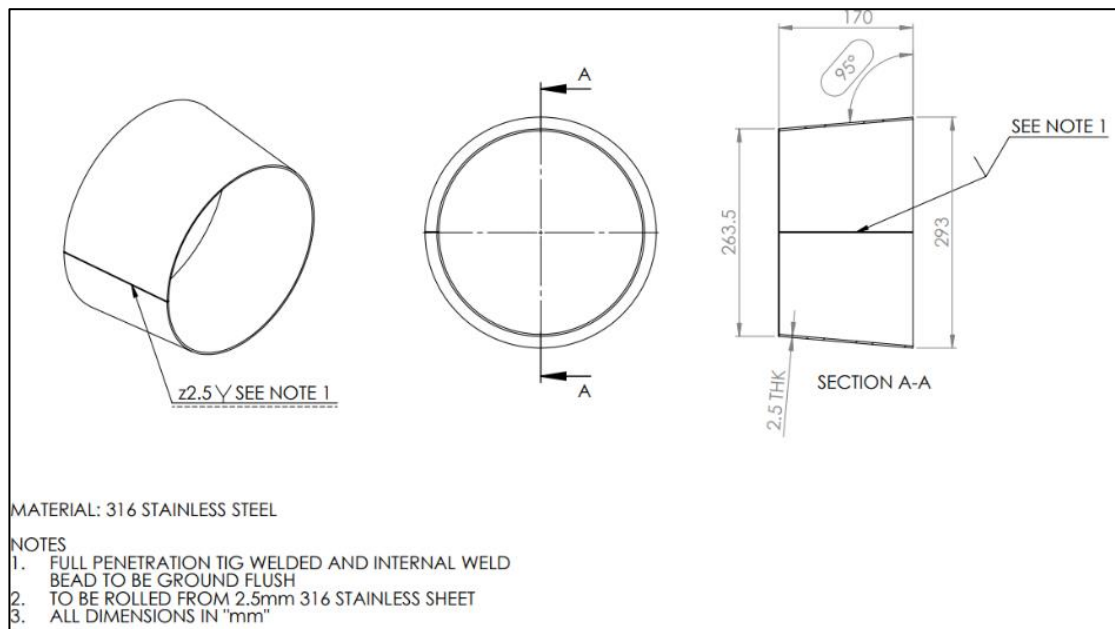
Manufacturing drawing of tapered 316 Stainless-steel sample used to simulate ILW 500 L drum in pressured state.
